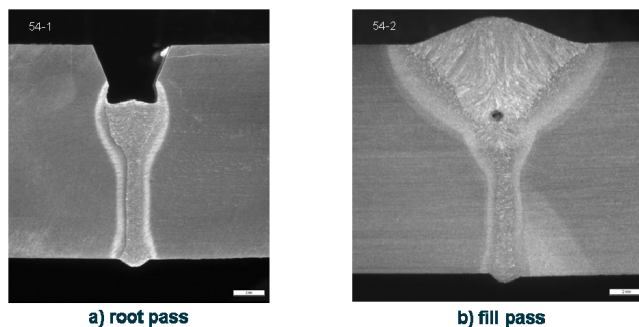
Cross-sections of 14 mm thick X70 material, single V-butt joint preparation, 8 mm root face and 45° included angle welded with solid wire
